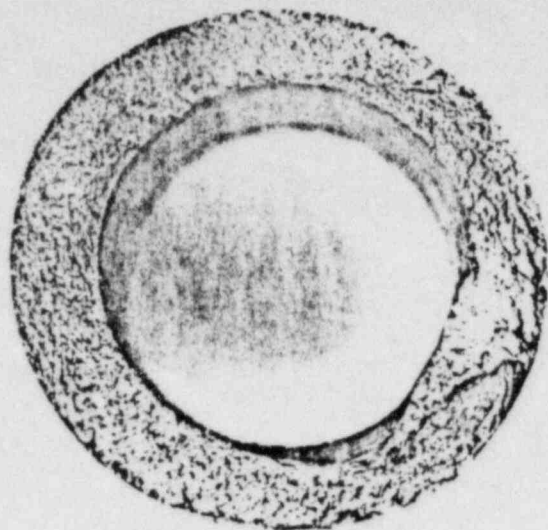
Optical Fractograph of Fracture Surface of Thermowell No. 111Y
